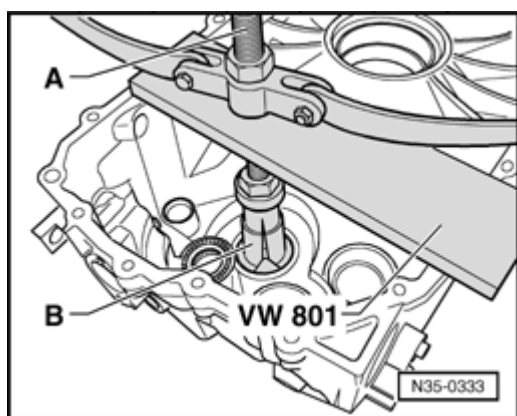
Pulling tapered roller bearing outer race out of transmission housing
